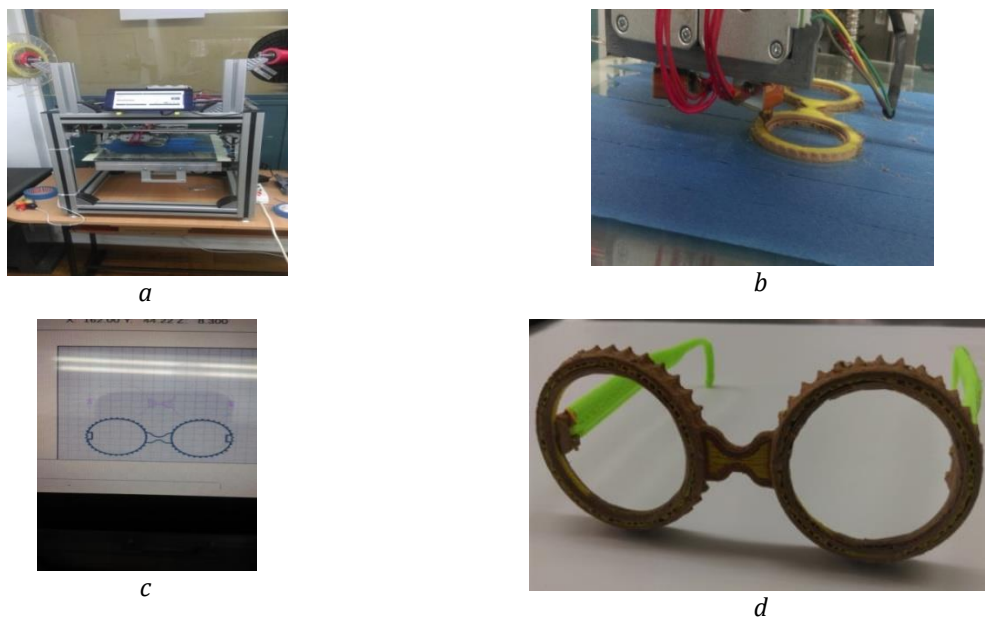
a - Double extruder 3D printer general view b - composite material printing detail view; c - print head trajectory; d - personalised eyewear obtained from Wood -PLA.
